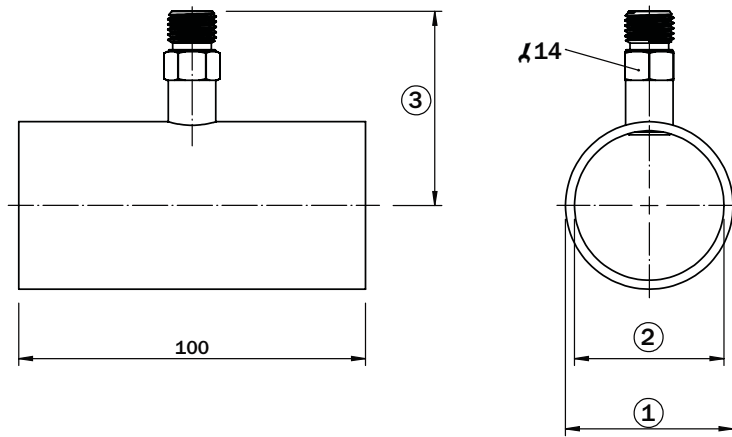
Dimensional drawing for clamp connection with weld end (P/N 2121340)
